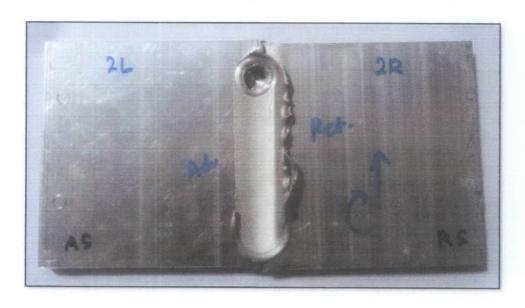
Sample 2, FSW plates (Round tool, 75 mm/min)
